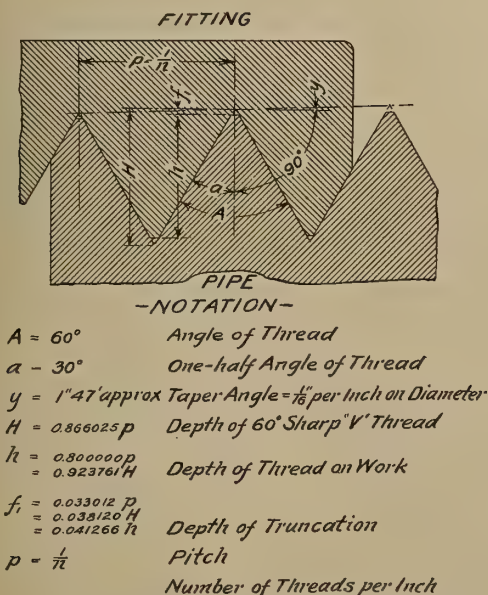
AMERICAN BRIGGS STANDARD THREAD FORM
